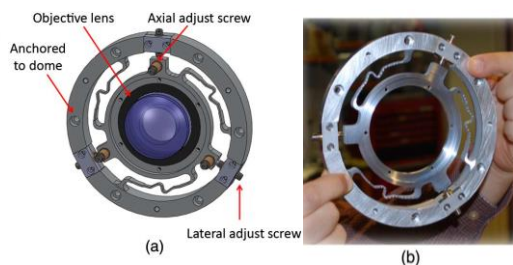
(Color online) (a) Solid drawing of flexure mount for main objective lens. (b) Photo of machined flexure.
